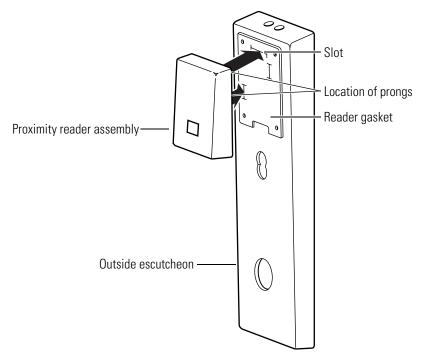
Positioning the B.A.S.I.S. V proximity reader assembly
